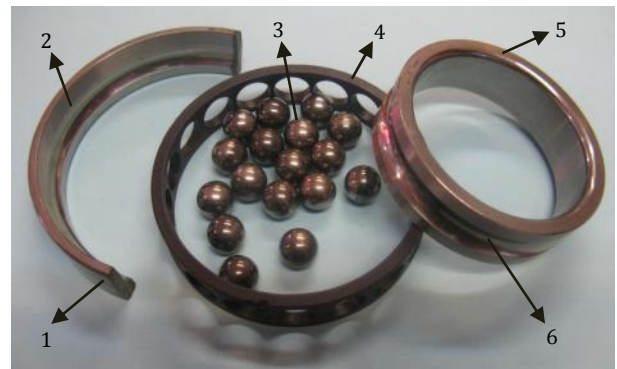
Components of a ball bearing; 1-outer ring, 2-outer race, 3-balls, 4-cage, 5-inner ring, 6-inner race.
